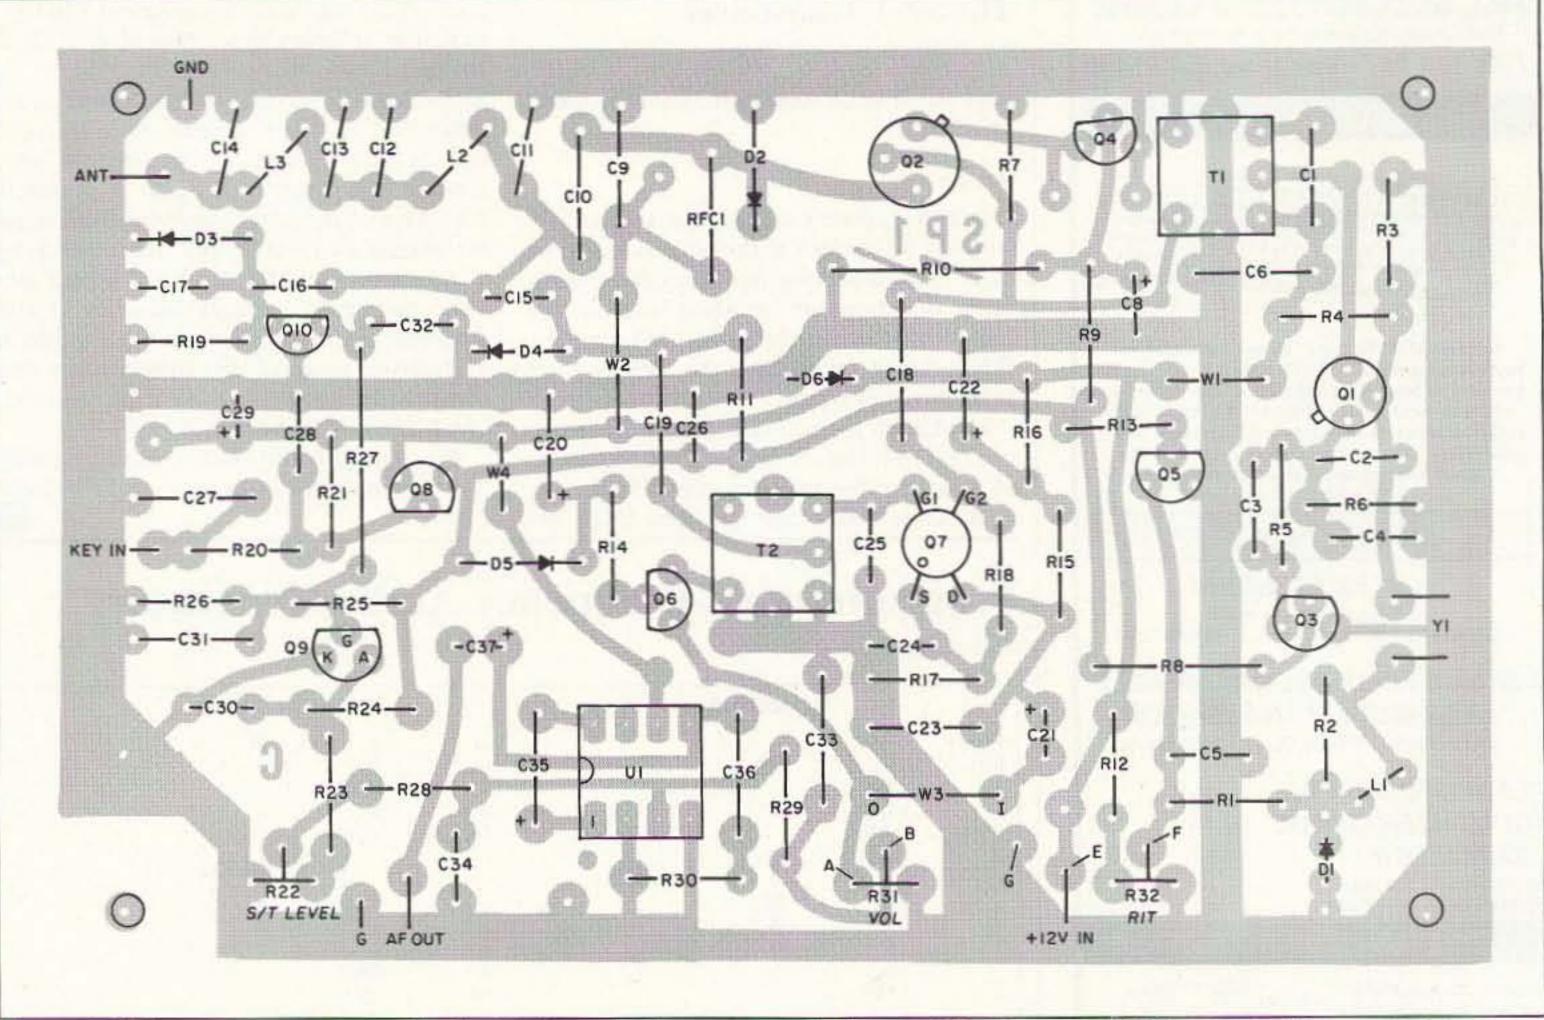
PC board parts placement. To disable the transmitter, remove wire jumper W2. Also remove R27 to lower sidetone pitch to normal with transmitter disabled.
